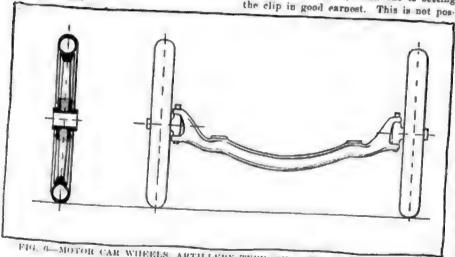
MOTOR CAR WHEELS, ARTILLERY TYPE, ON STRAIGHT SPINDLES
